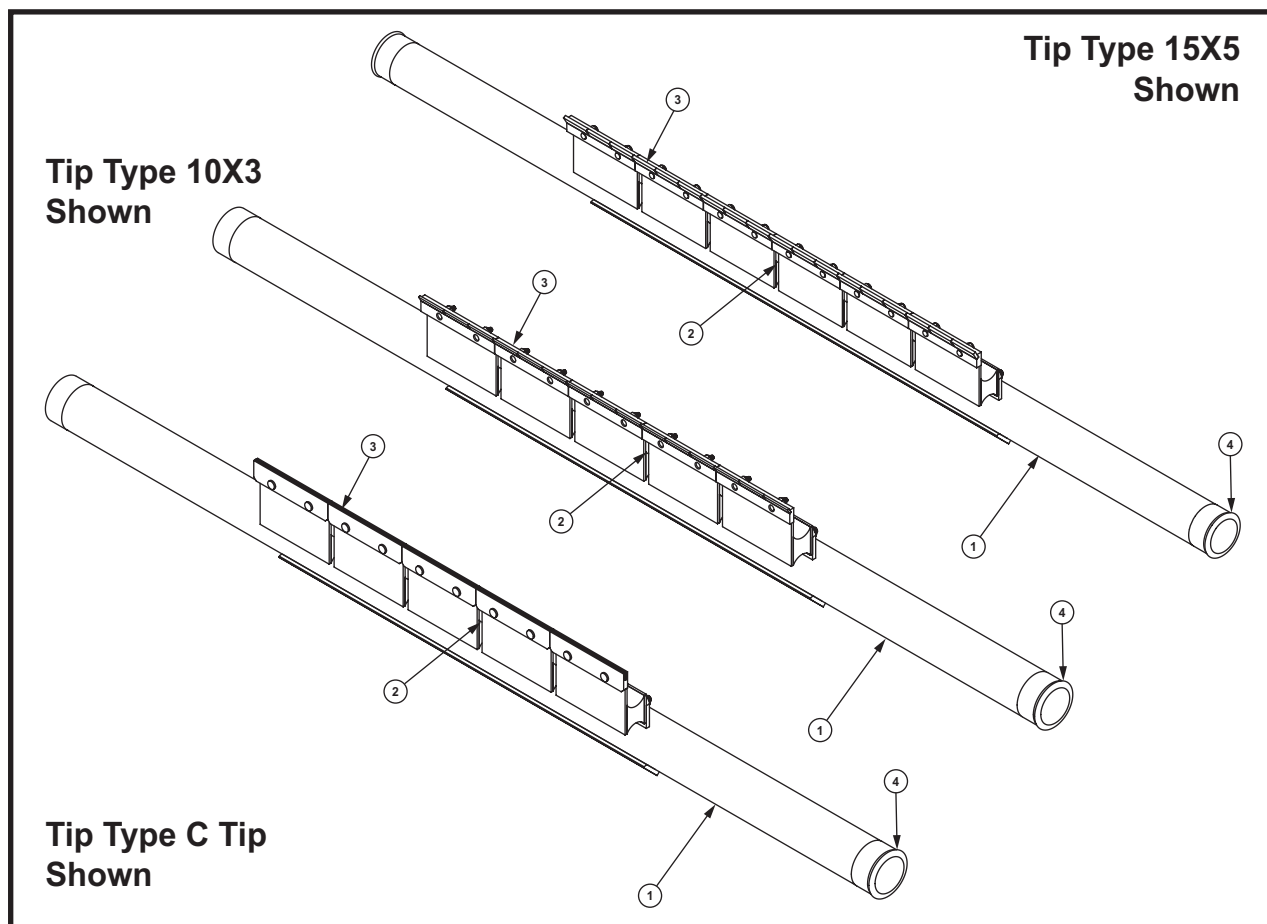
Martin® P2 Secondary Belt Cleaner HD, P/N C2PH1SXXXXXXX
